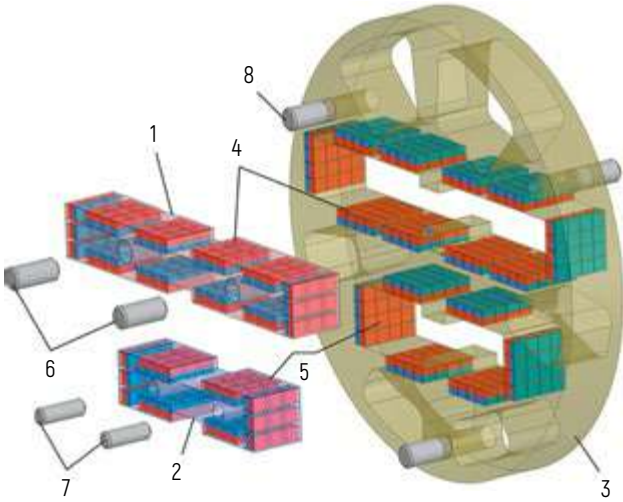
Assembly of the GPV components: 1 – segment of the rotor 1; 2 – segment of the rotor 2; 3 – segment of the stator; 4 – MSSU of the rotor 1; 5 – MSSU of the rotor 2; 6 – guide components of the rotor 1; 7 – guide components of the rotor 2; 8 – guide components of the stator
